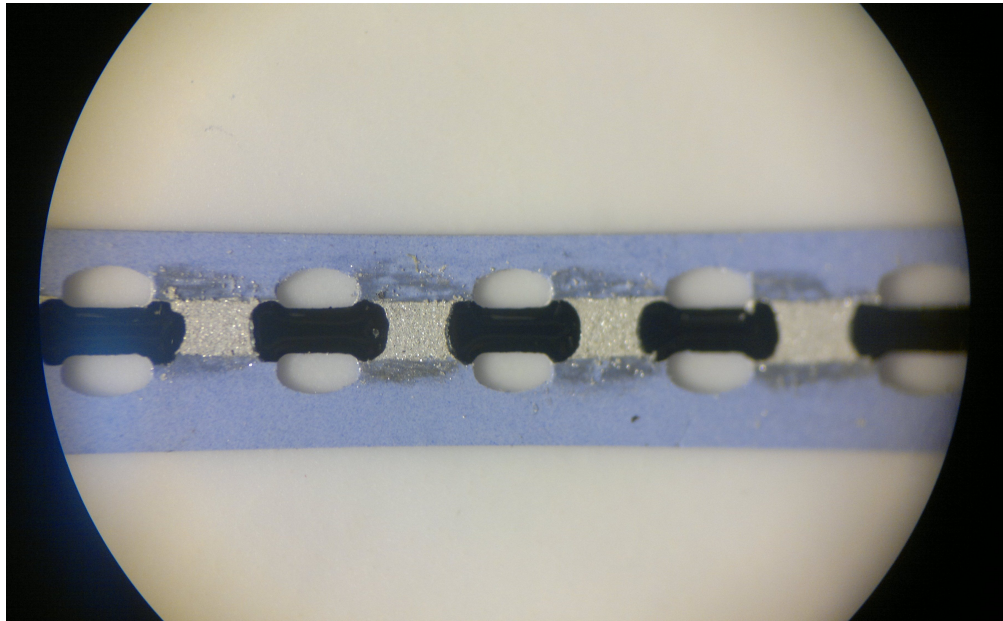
Design D14 thickfilm heaters printed on a single sheet of LTCC
